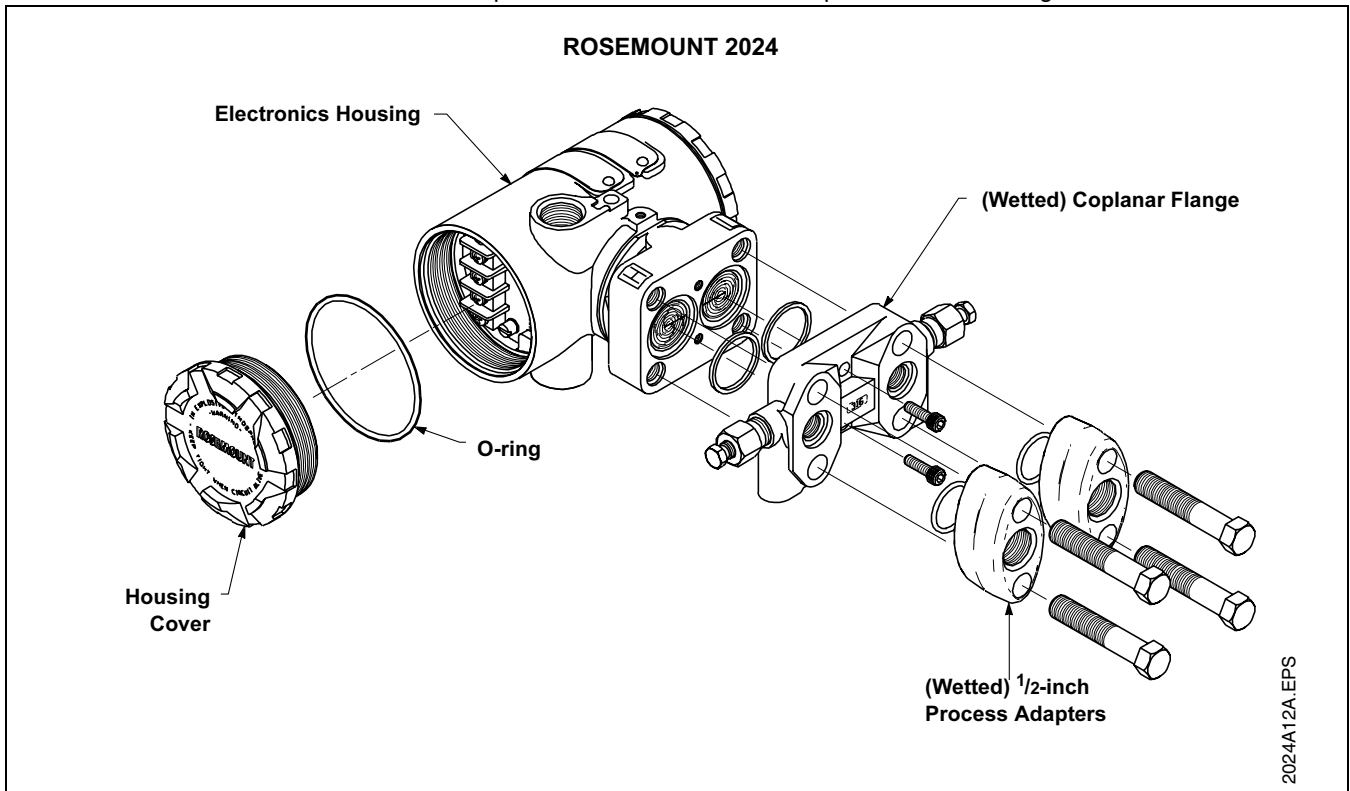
Rosemount 2024 Coplanar Pressure Transmitter Exploded View Showing Wetted Parts.
